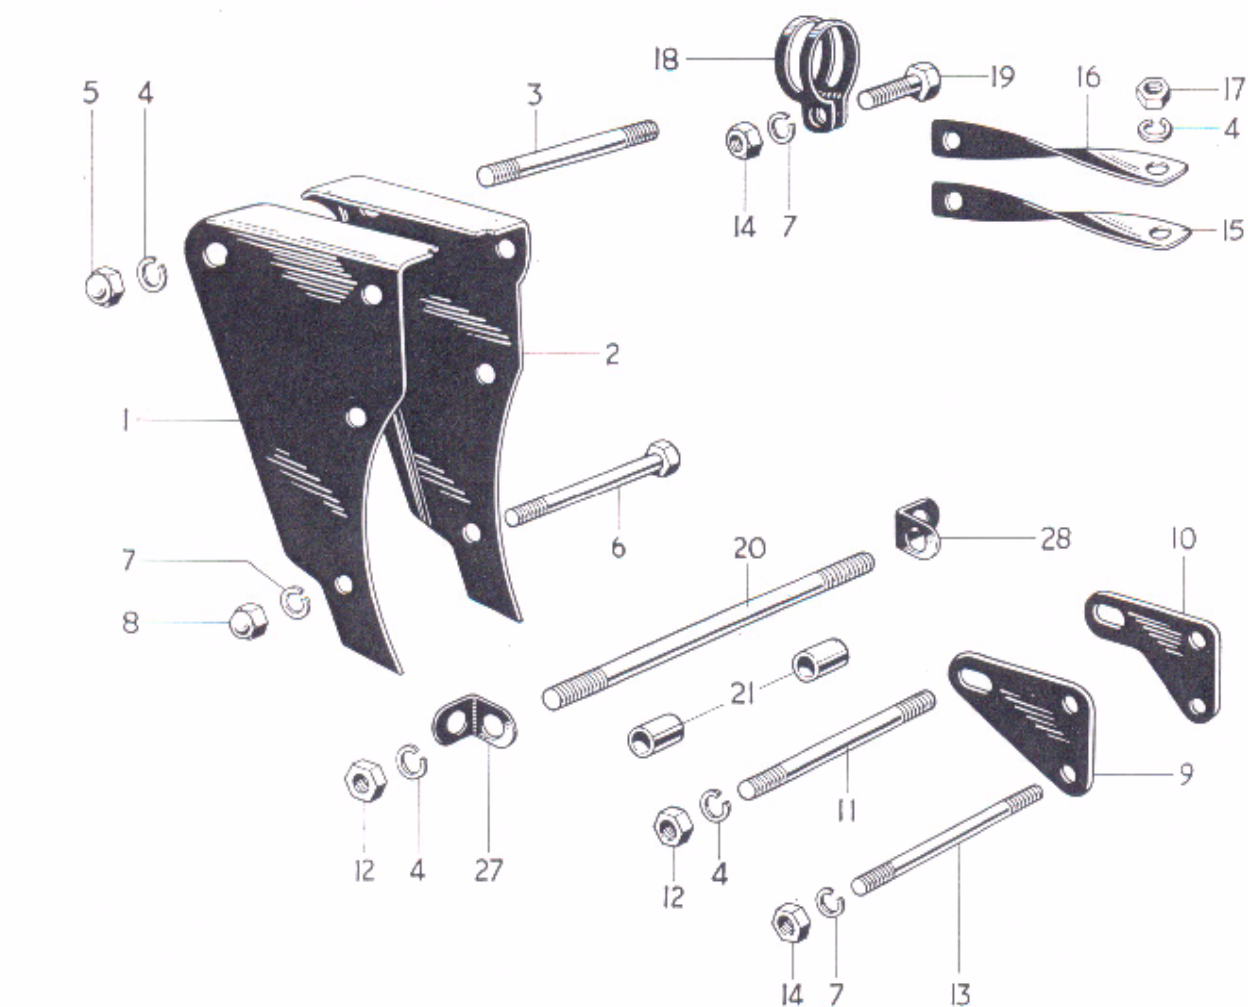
ENGINE FITTINGS AND EXHAUST SYSTEM.
